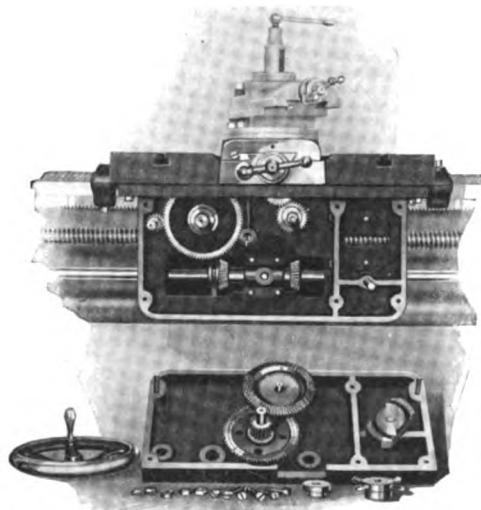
Double Plate Apron on 25 to 36-Inch Heavy Pattern Sidney Lathes
